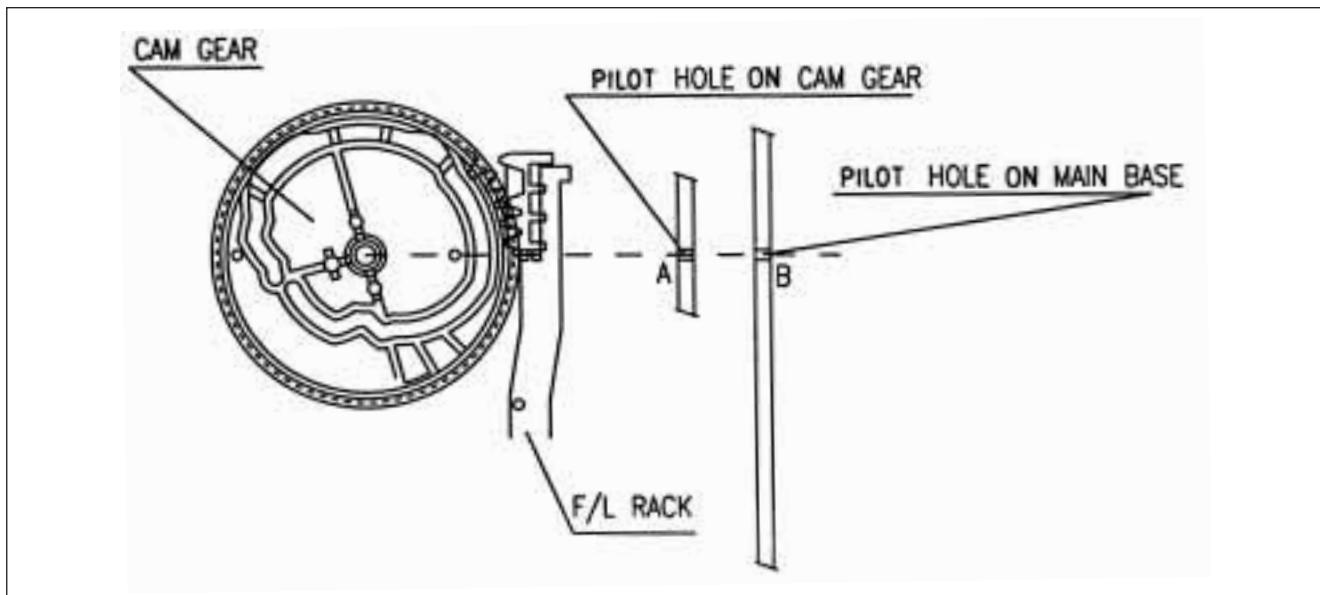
Mechanical Checks/Cam Gear and F/L Alignment
